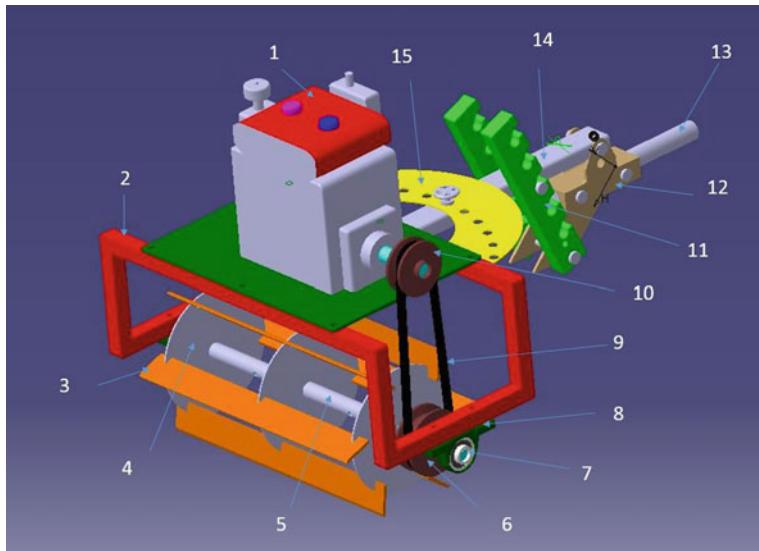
(1) Engine block; (2) Support Frame; (3) Blade; (4) Flange; (5) Rotor shaft casing; (6); Pulley; (7) Rotor shaft; (8) Bearing; (9) Pulley belt; (10) Pulley; (11) Vertical lifting arm; (12) Bracket; (13) Shaft connecting to the power tiller; (14) Arm; (15) Arm locking plate with pin
